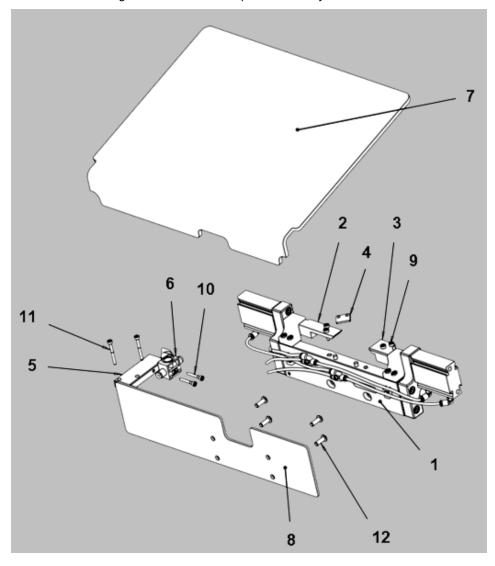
HV-CP Clamp Kit Assembly 2335410-1
